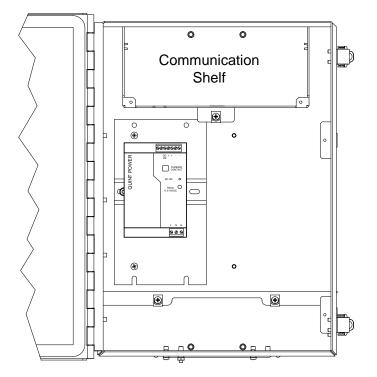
6700 Optional Equipment Enclosure with Power Supply
